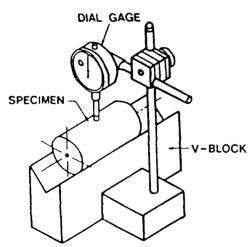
Assembly for Determining the Straightness of the Cylindrical Surface
